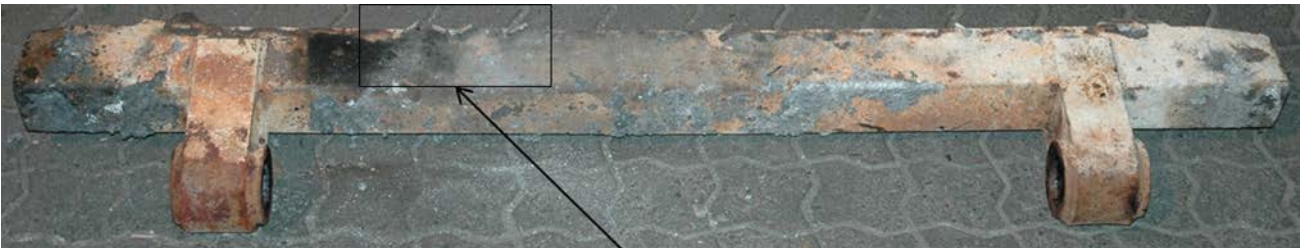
Image of trailer tongue end brace having spot welds and remains of wire mesh.
